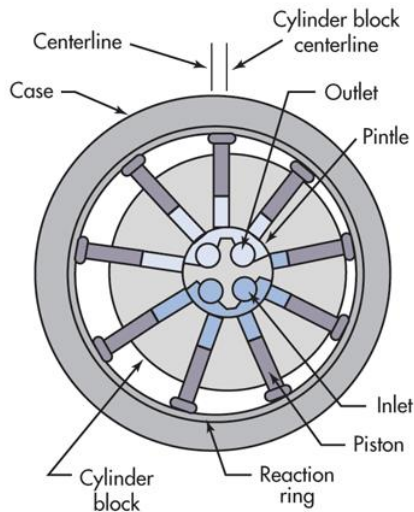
Radial piston motor [\(Hydraulics & Pneumatics, 2014\)](#).
